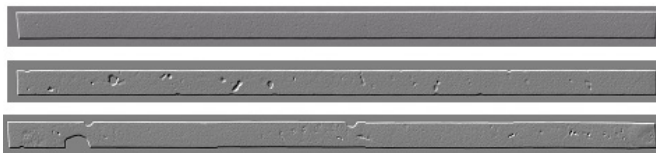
X-Ray Inspection of Solder Test Specimens (Good and Bad Samples)
